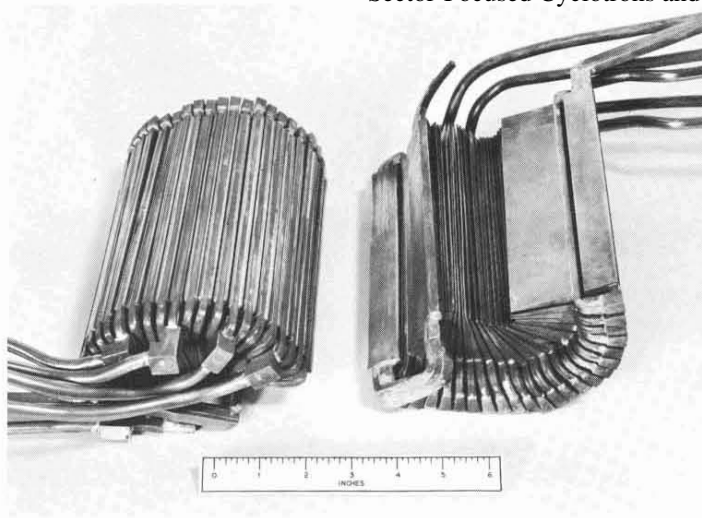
Partial assembly of the 48 wedge-shaped coaxial conductors.
